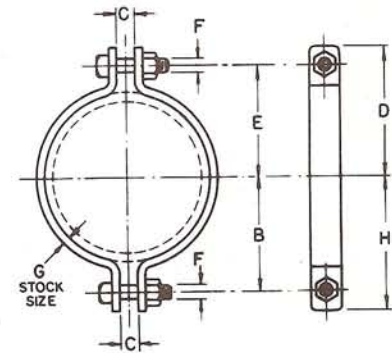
Pipe Clamps are of carbon steel. Normally furnished in black, galvanized to order. To be used with Fig. 33 Eye Rods or Fig. 279 Weldless Eye Nuts.
